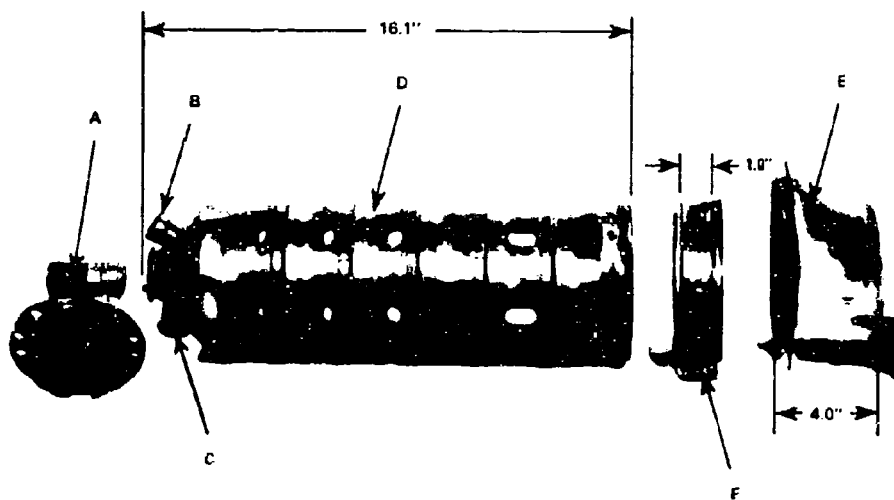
Exploded View of Combustor System Used for Emulsified Fuel Combustion Tests Showing A. Fuel Nozzle and Manifold, B. Ignitor Boss, C. Blanked Off Cross-over Tube, D. JT12 Burner Can, E. Transition Duct, and F. Burner-transition Clamp.
